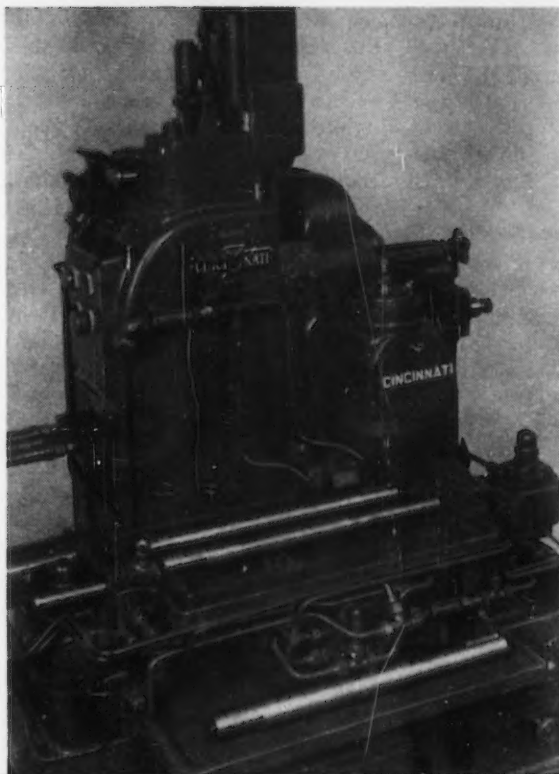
A gravity feed to clamping position and automatic clamping place these parts for the milling head to drop into cutting position. After milling, the parts discharge through the fixture and out on to the lower tray.
